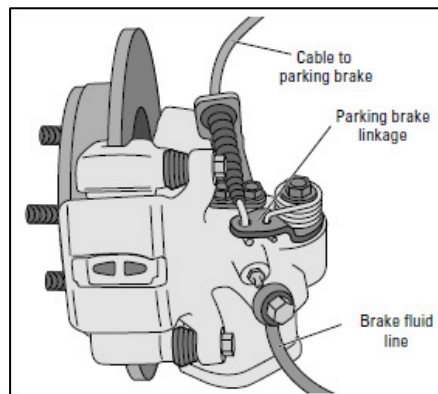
Rear brake disc assembly (Halderman, 2009)
